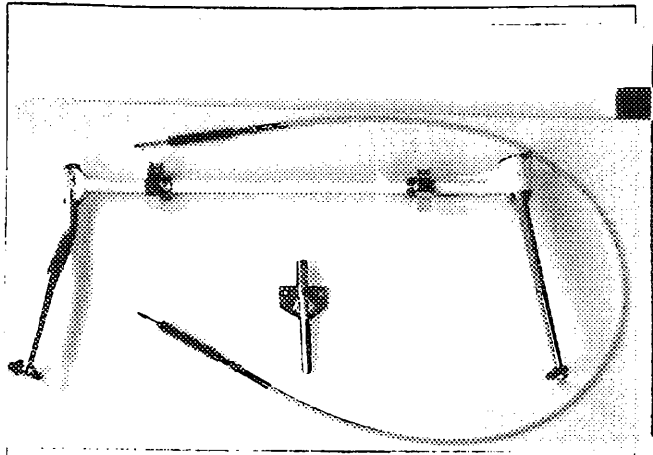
REAR ADJUSTABLE STABILIZER ASSEMBLY
